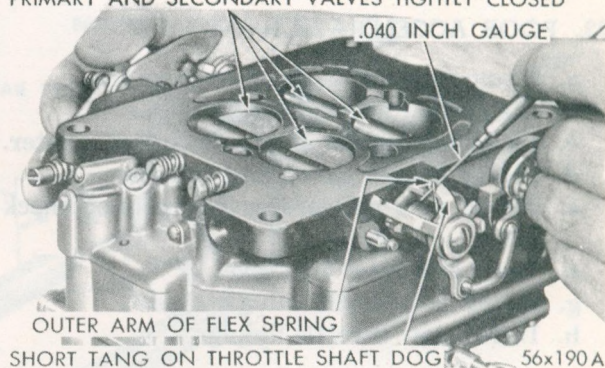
Checking Opening of Secondary Throttle Valves (Step 4)
